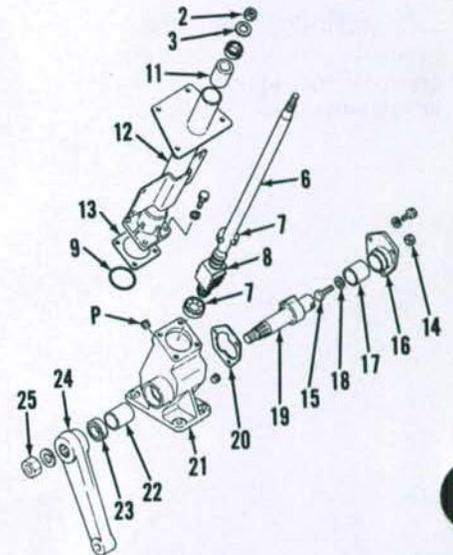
Exploded view of steering gear typical of type used on YM135, YM135D, YM155 and YM155D models.
